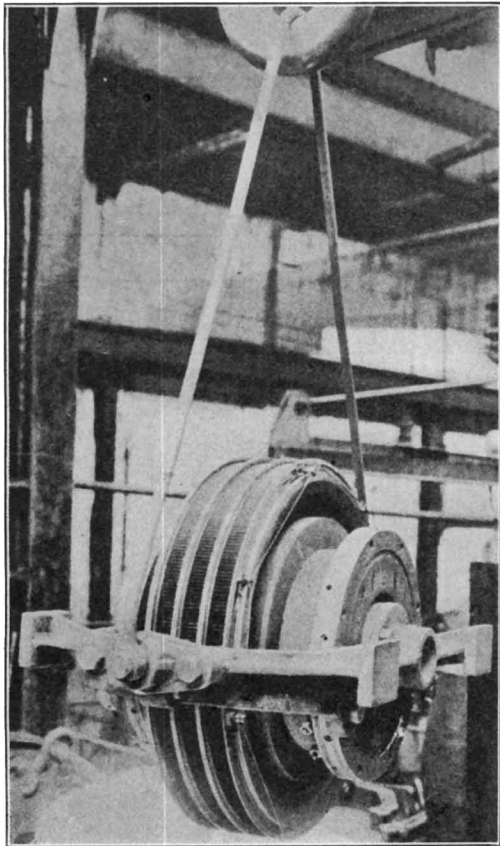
COMPLETE TURBINE LIFTED CLEAR OF CASING
